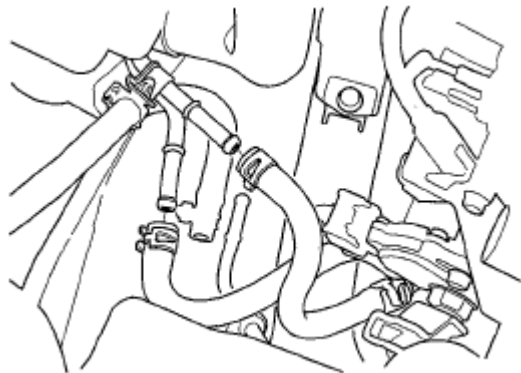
Identifying Plug ATF Cooler Hoses And Lines
